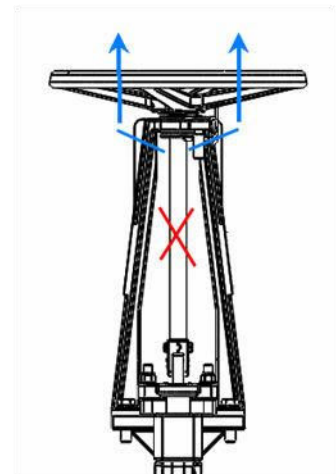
Knife Gate Valve with Handwheel or Chainwheel Actuator, Vertical Lifting
